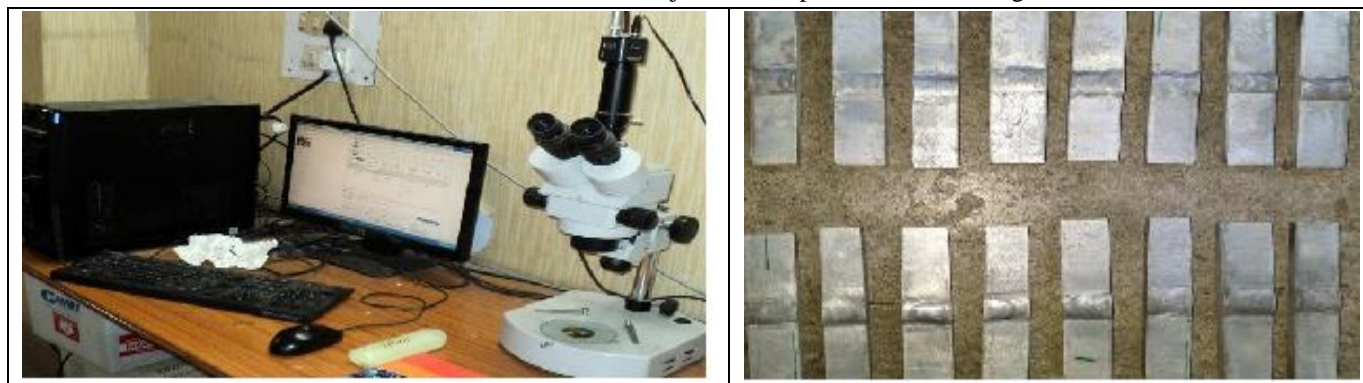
Aluminium alloy 6063 plates after welding process
